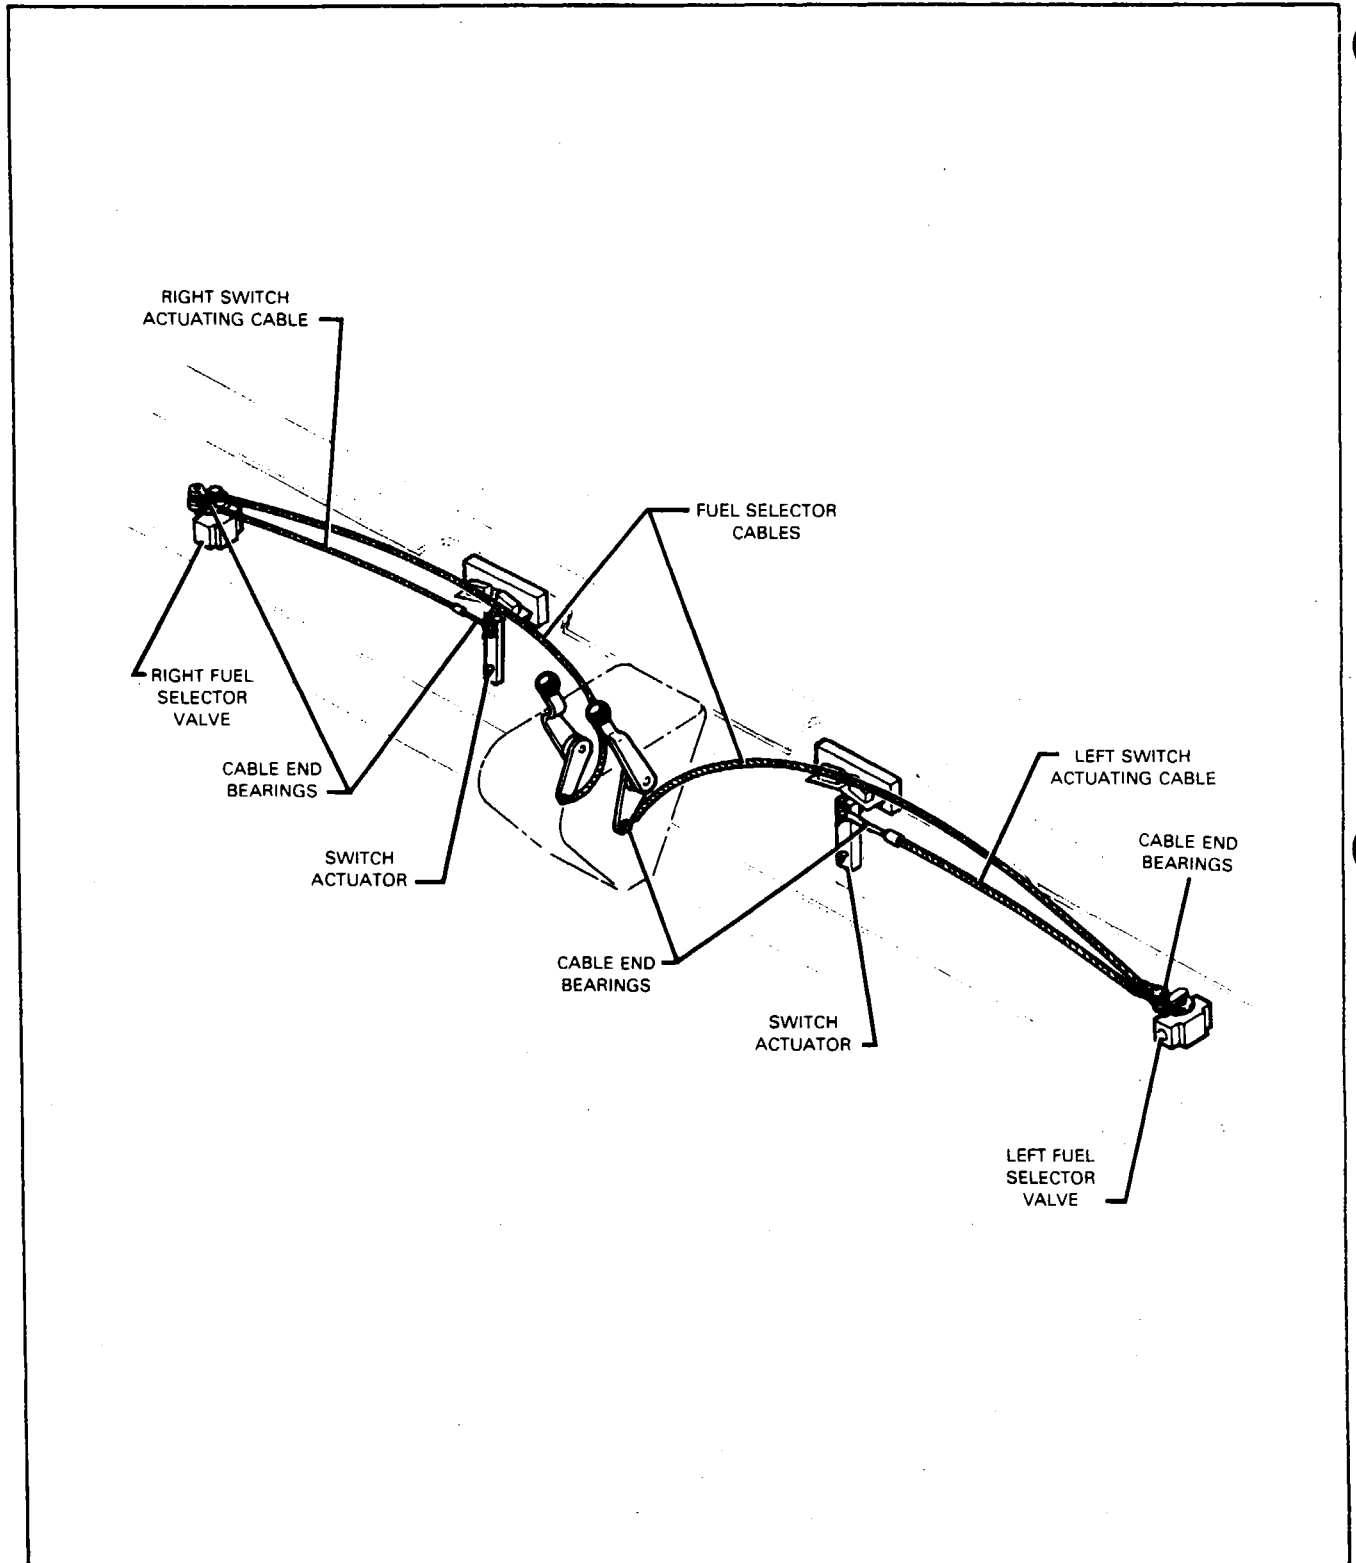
Fuel Selector Cables, PA-23-250 (six place),
